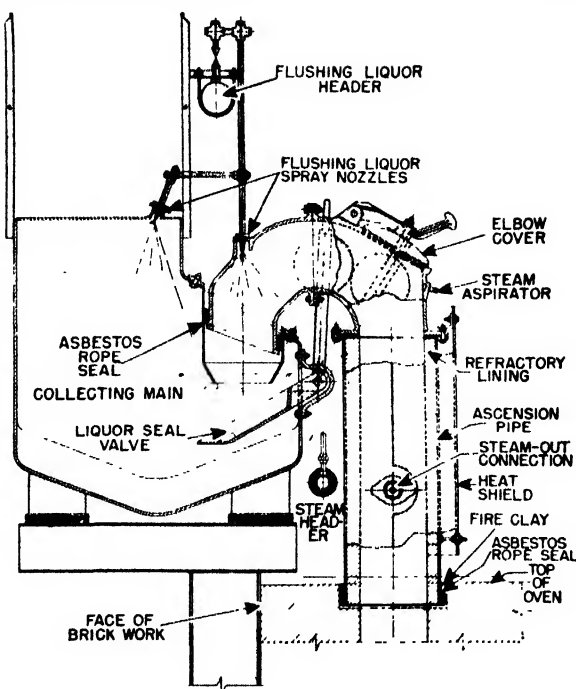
Water-sealed damper valve of the design employed by Koppers Company, Inc., through whose courtesy this drawing is reproduced.
